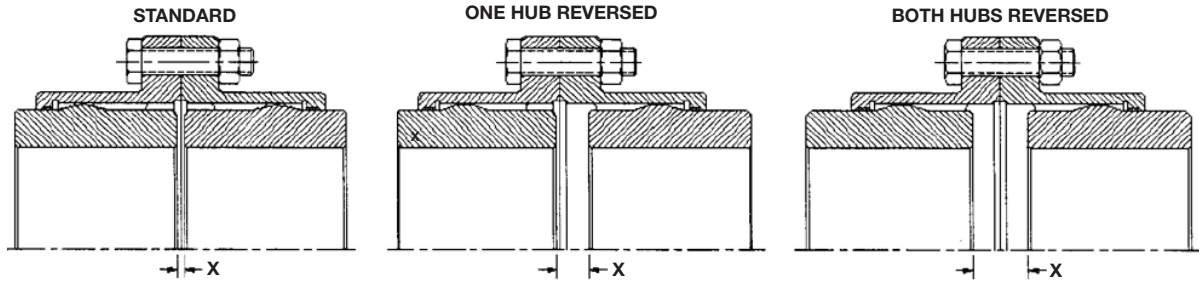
"X" Dimension Between the Driver and Driven Hub Ends
